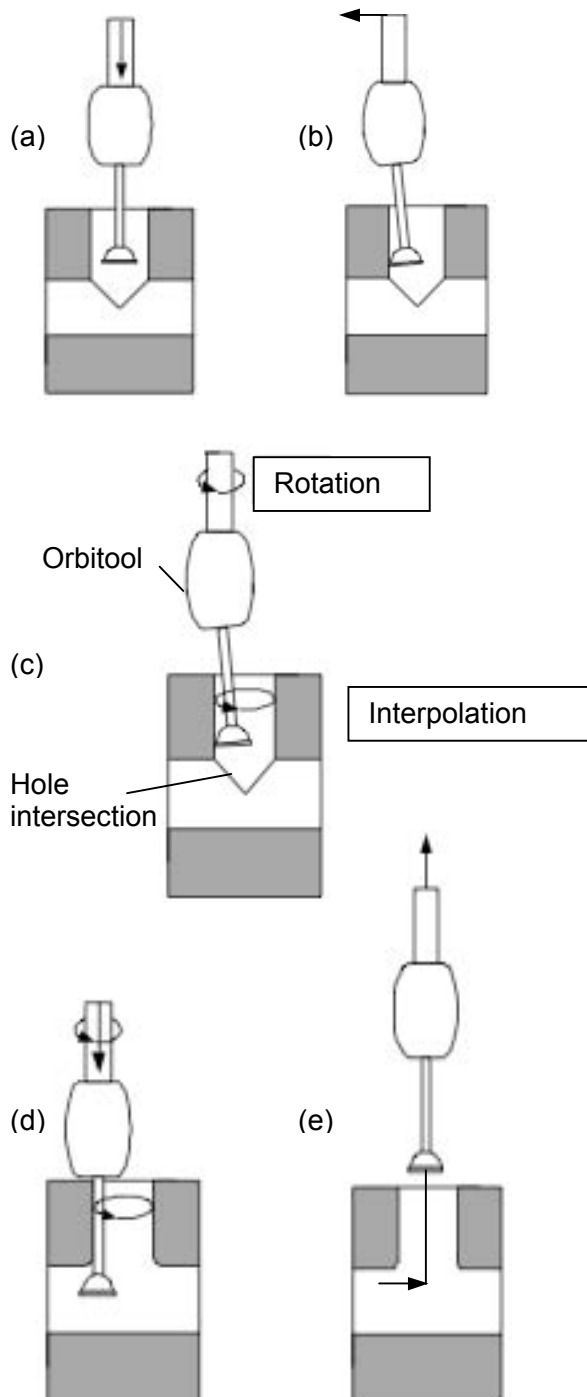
OVERVIEW OF THE ORBITOOL PATH. (a) INSERTION INTO HOLE, (b) LOADING, (c) START OF MACHINING, ROTATION AND INTERPOLATION, (d) END OF MACHINING (e) WITHDRAWAL.
